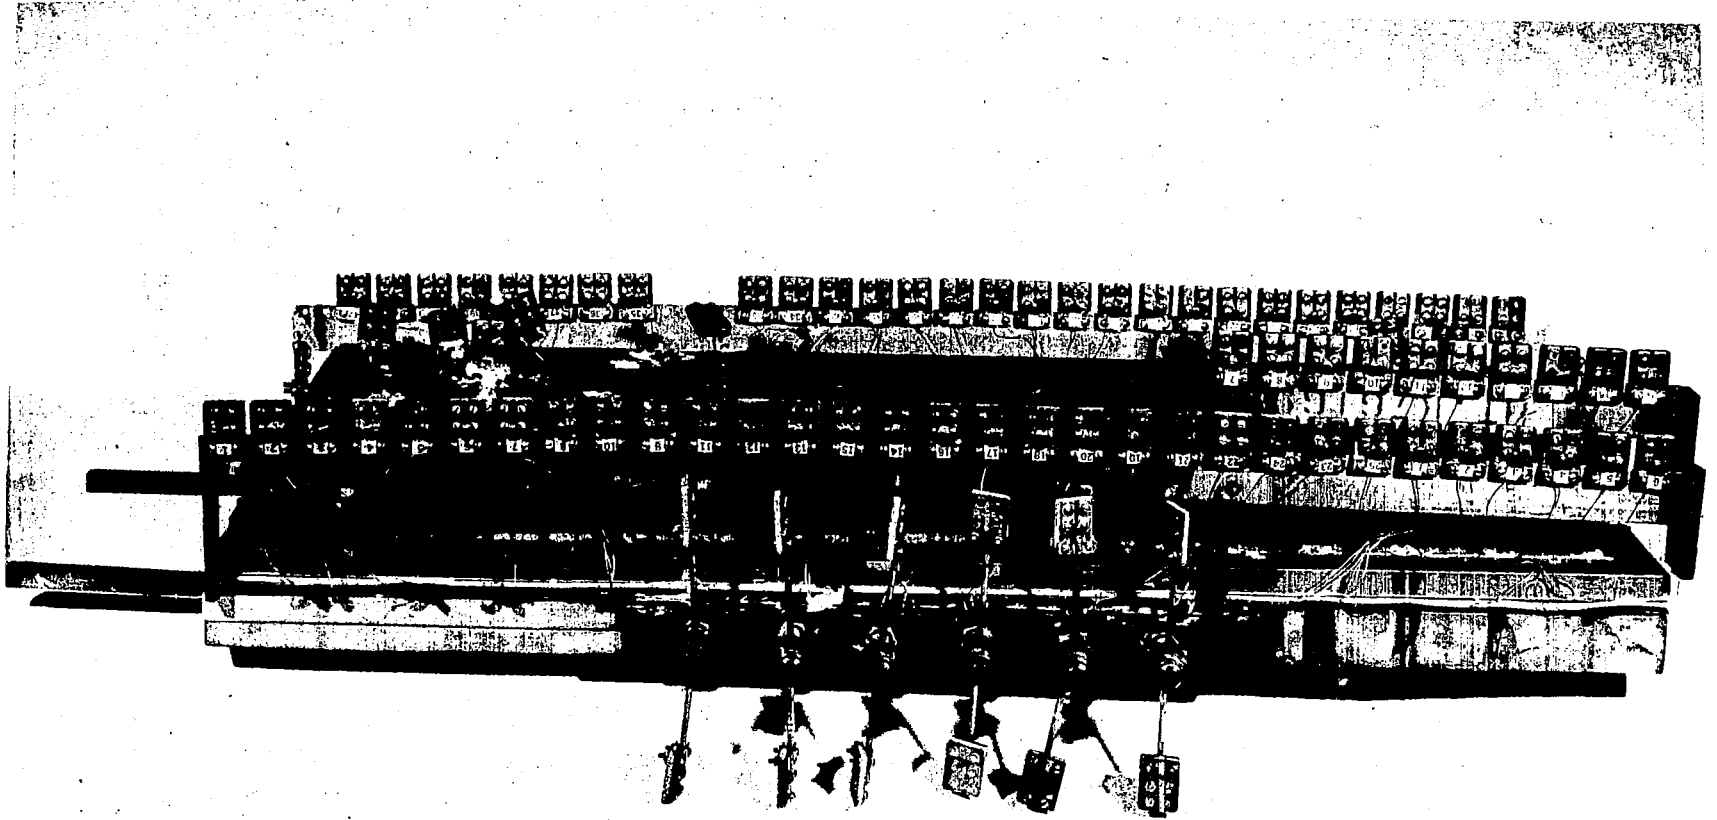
Assembly of Modified H6 Planar Fin XP-74167
